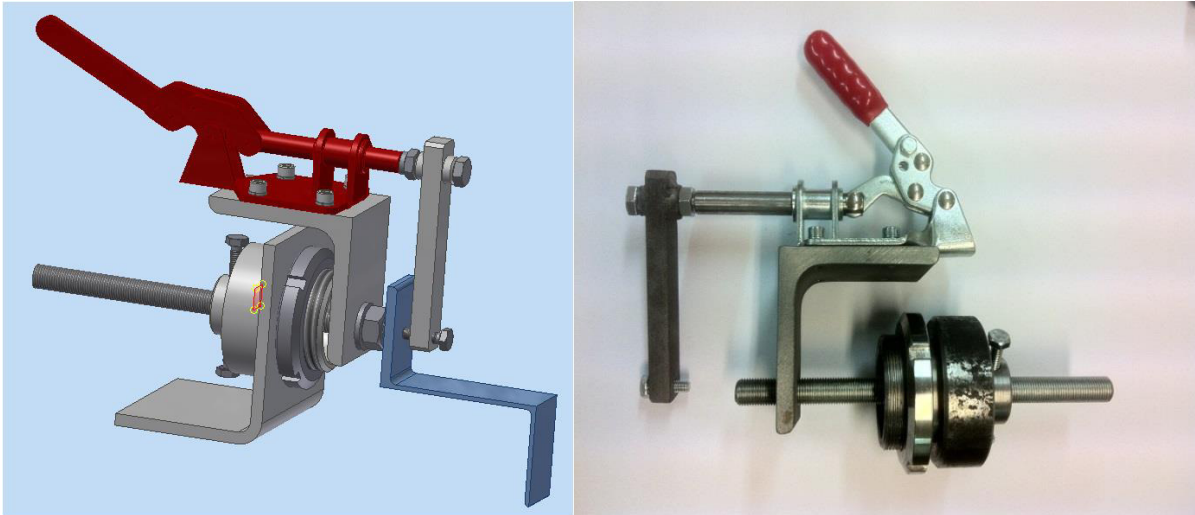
Designed panel leveling tooling on the left in closed position and fabricated assembly on the right in opened position
